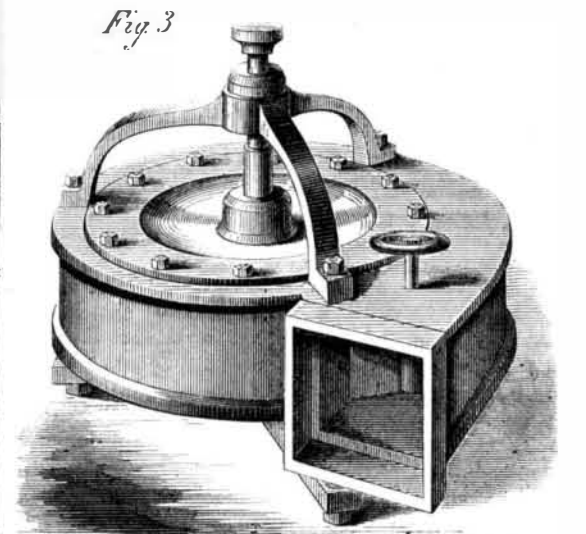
is a perspective view of the wheel when placed in the scroll, also showing the method of supporting the lower bearing of the
